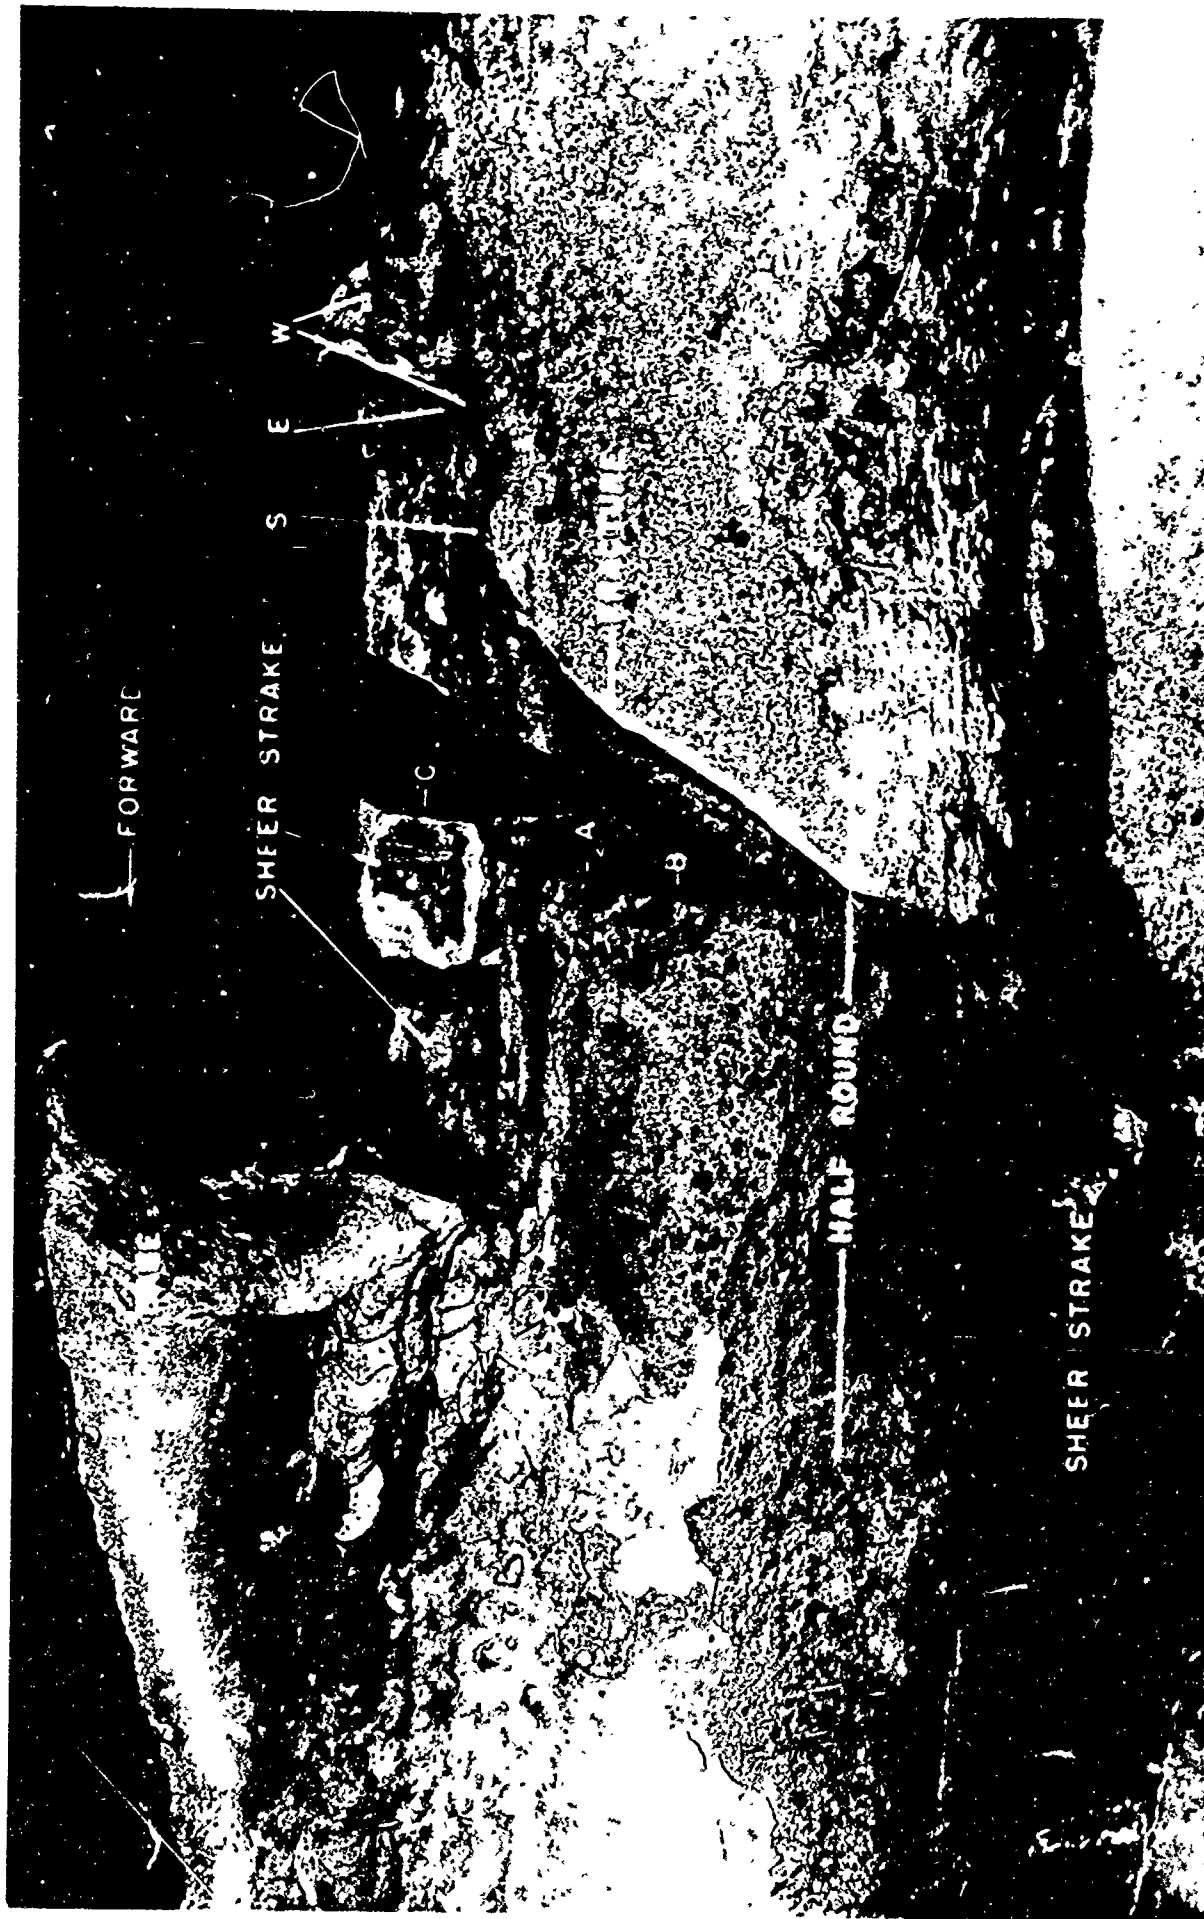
Fracture in half round viewed from outboard side. Part of the chock base, which originally extended to the weld (w) at the right was lost as a result of battering. B, A, and C indicate the location of specimens cut from the half round and the sheer strake for metallographic examination. x 1.
